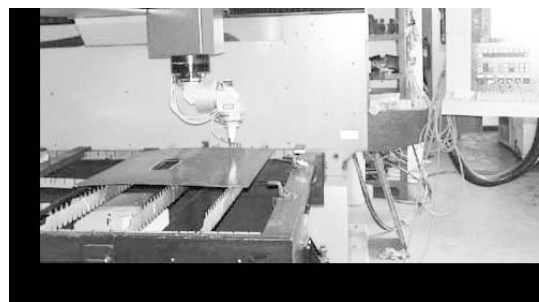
Typical apparatus of CO₂ LASER cutting machine(김정훈 등, 2006)
